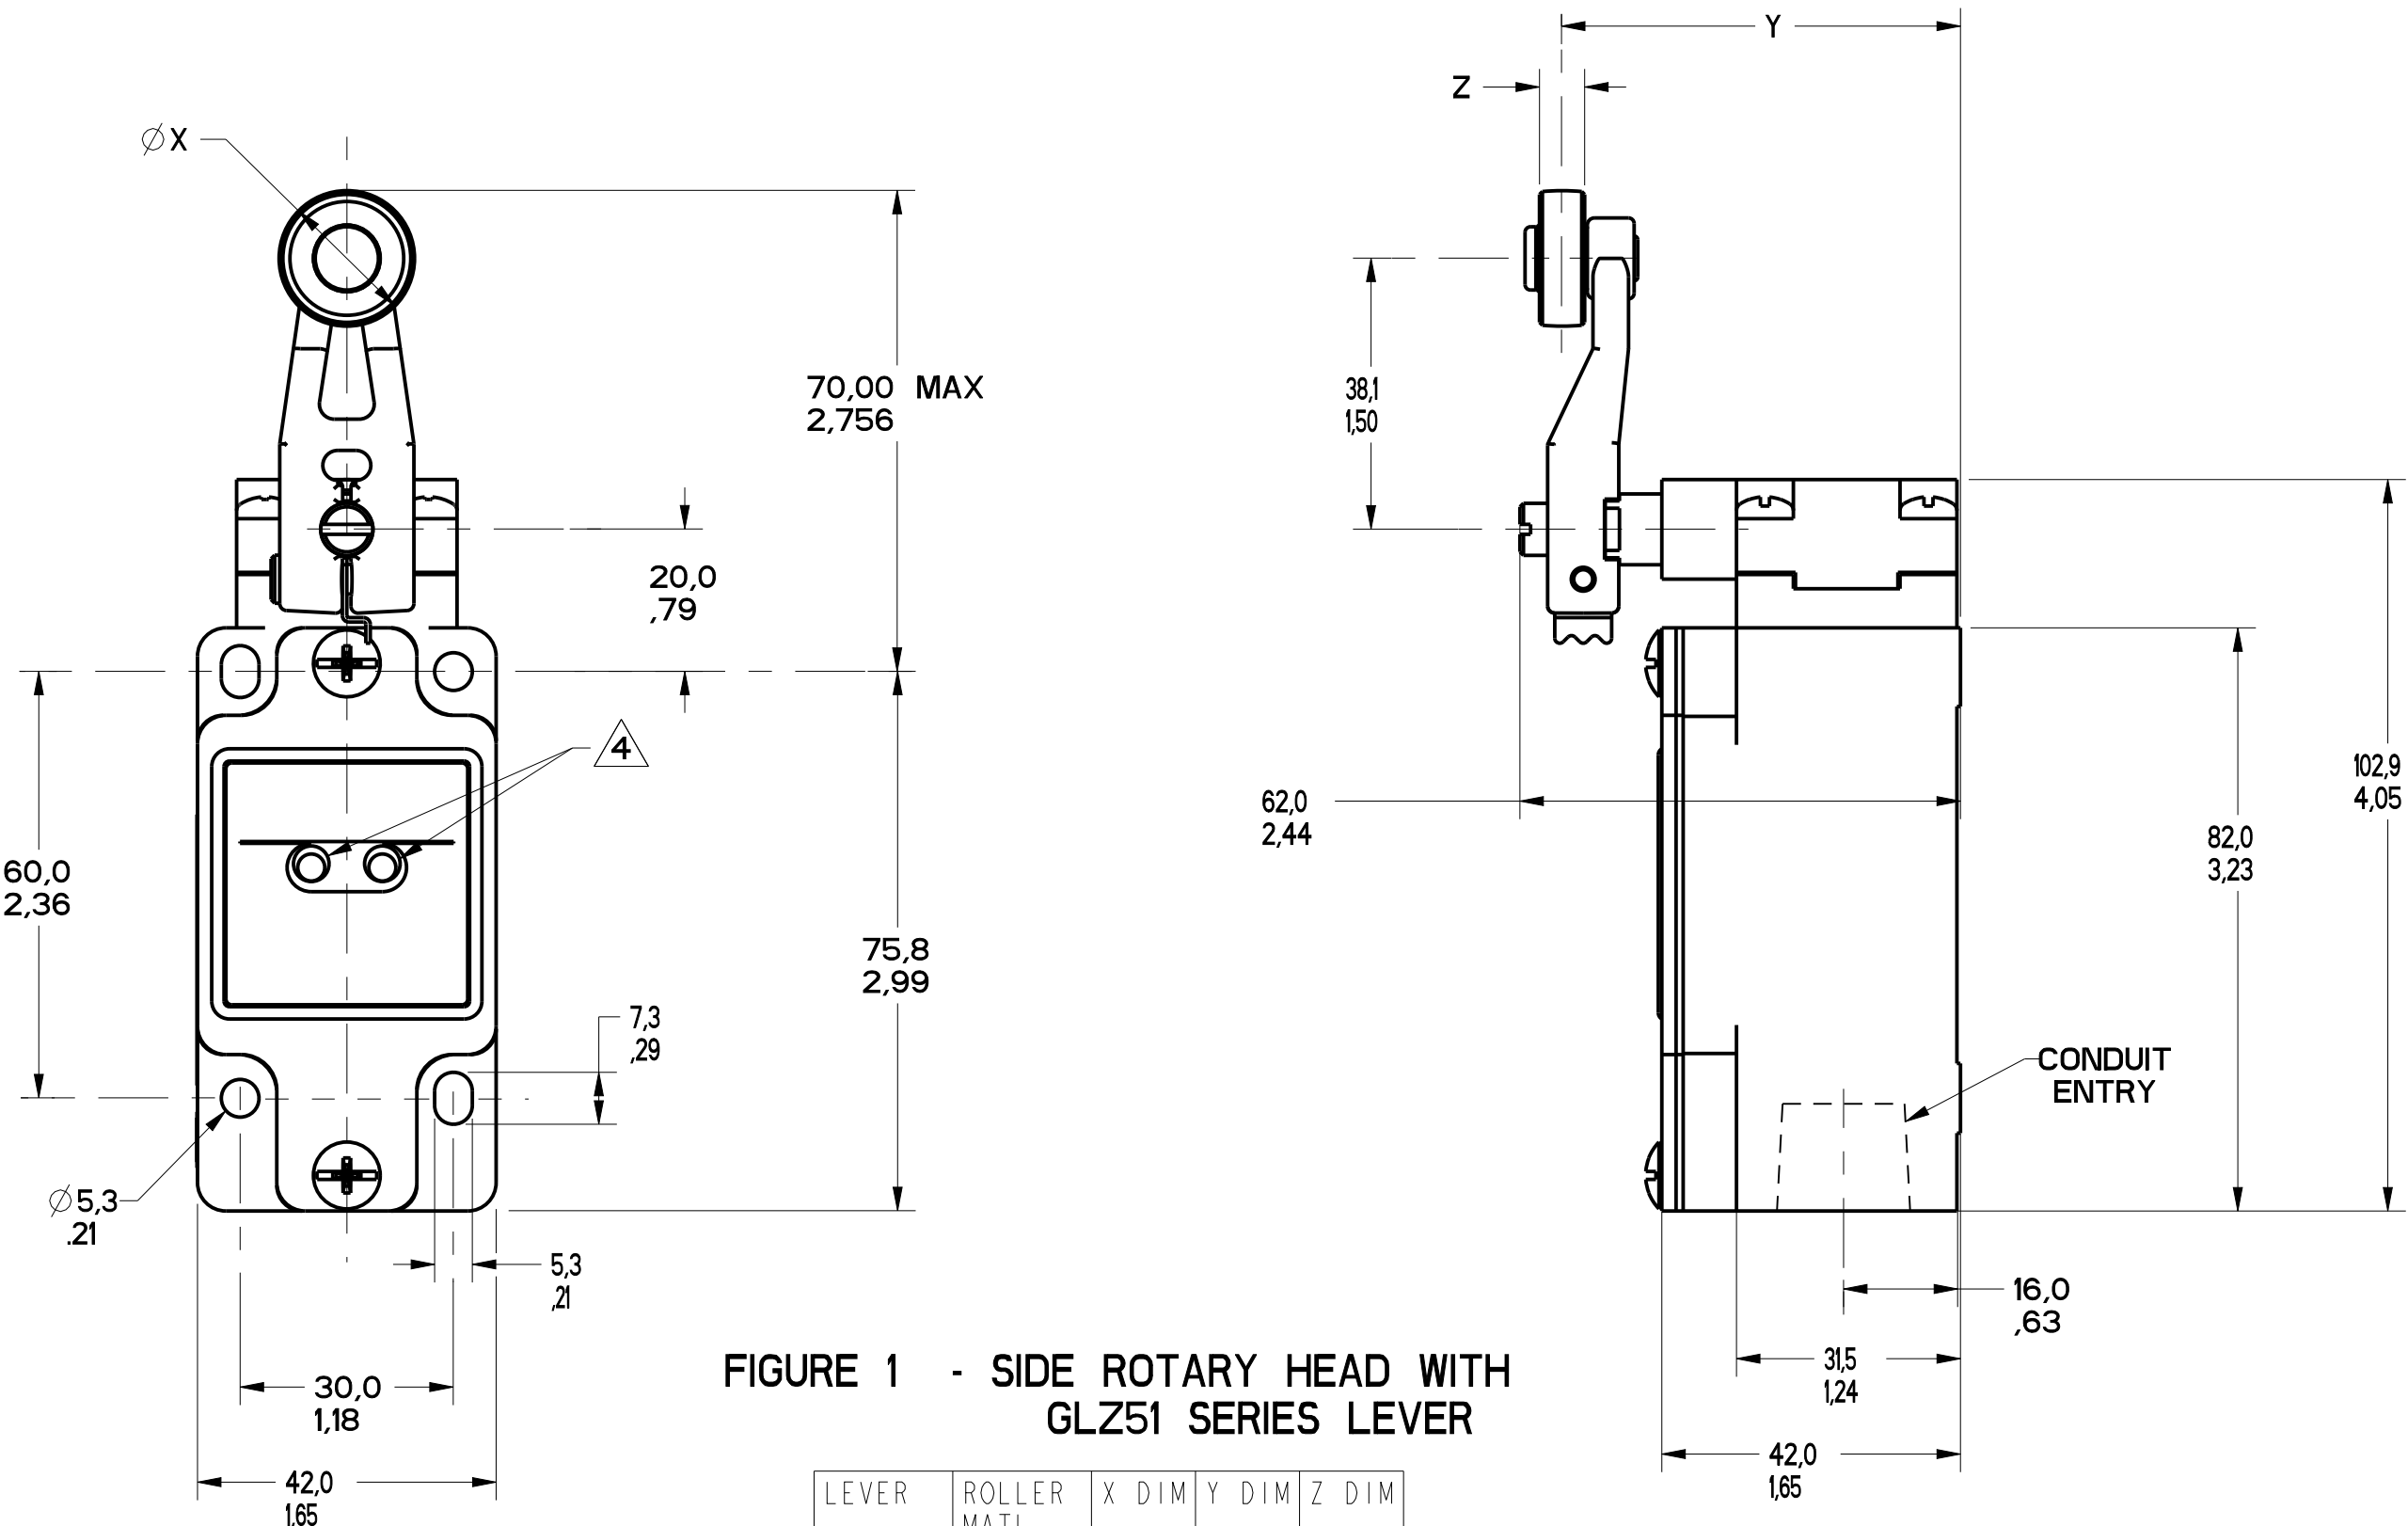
SIDE ROTARY HEAD WITH GLZ51 SERIES LEVER
